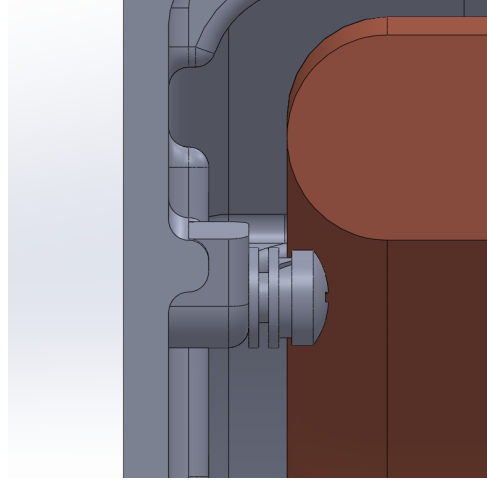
Image of ground screw inside CAD assembly of shortened housing design
